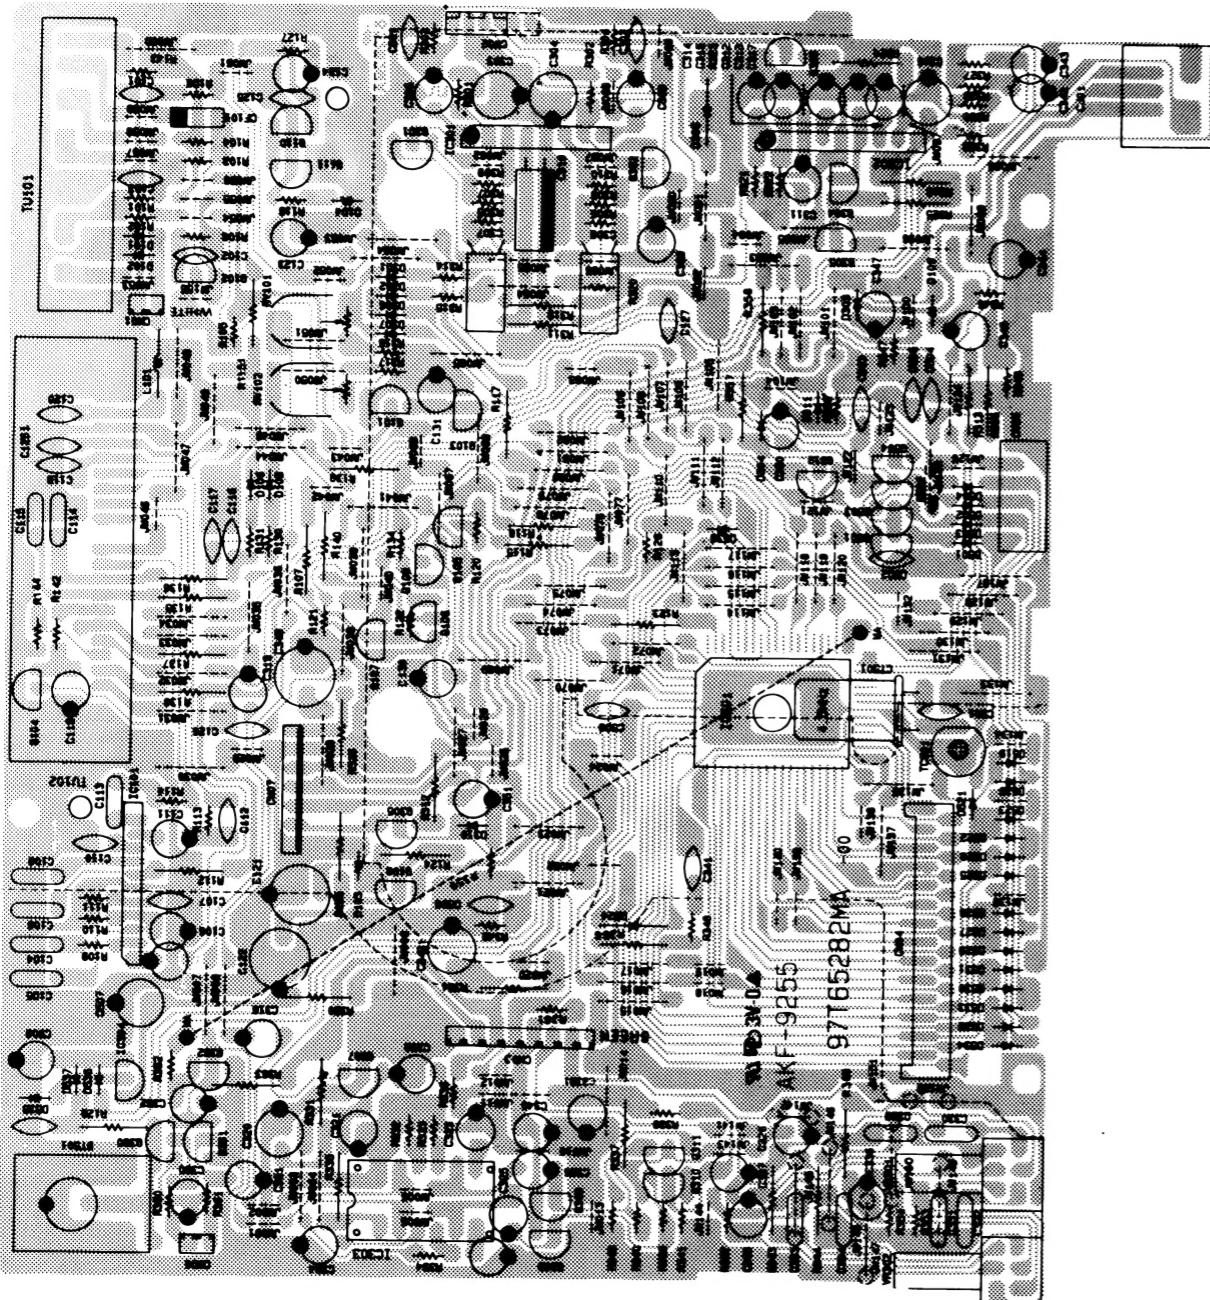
AKF-9255 TUNER P.C. Board.
